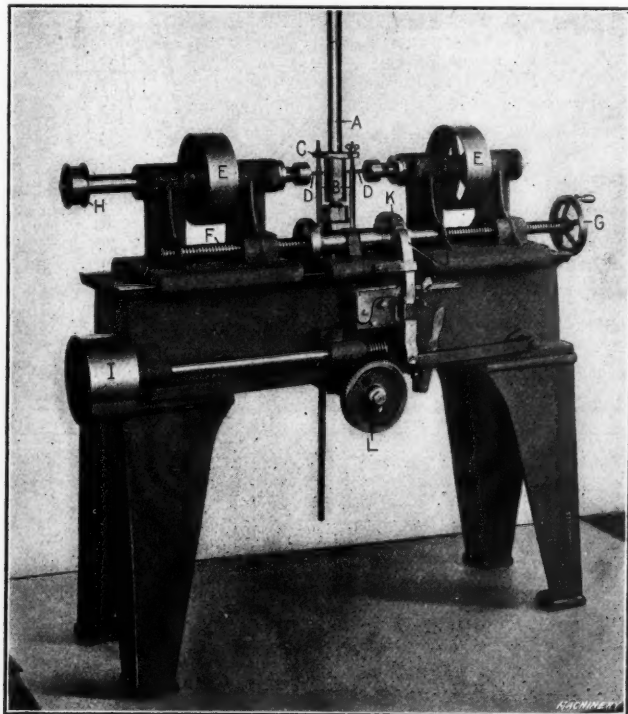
Milling Drift Hole in Drill Spindles with a Special Two-head Milling Machine
